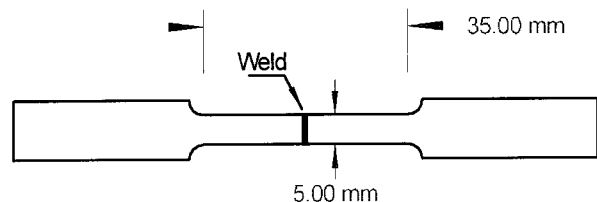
A tensile bar showing the weld plane perpendicular to the tensile axis.
